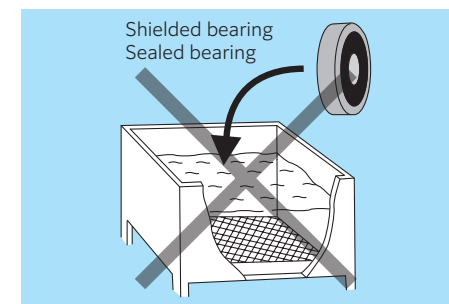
Heating grease filled bearings in oil bath prohibited
